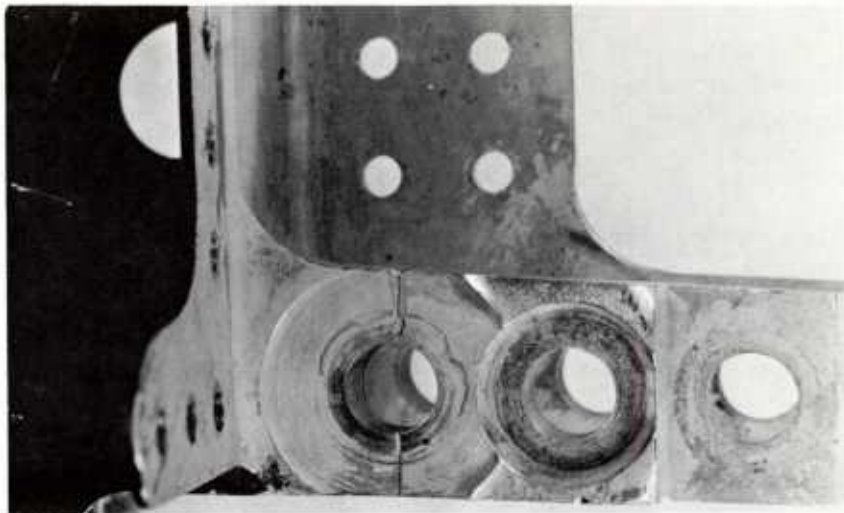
Fatigue failure in wing-fold fitting—gouged fillet.
